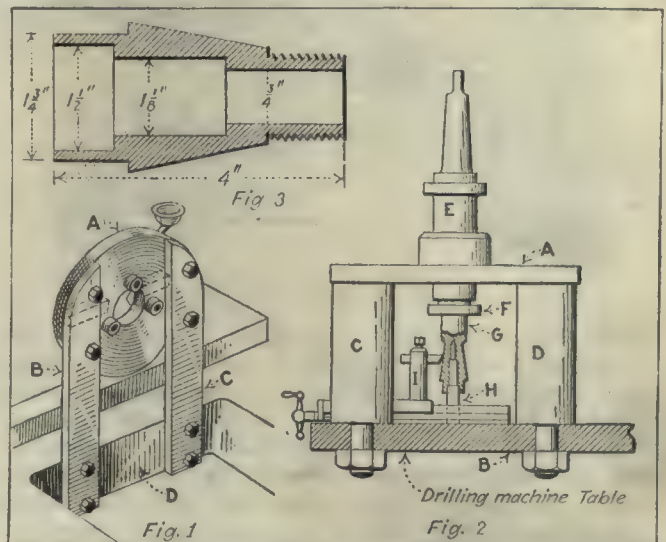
ROLLER REST FOR TURNING PUMP RODS. FIG. 2—TOOL FOR TURNING AND BORING ON DRILL PRESS. FIG. 3—THE PIECE TURNED
